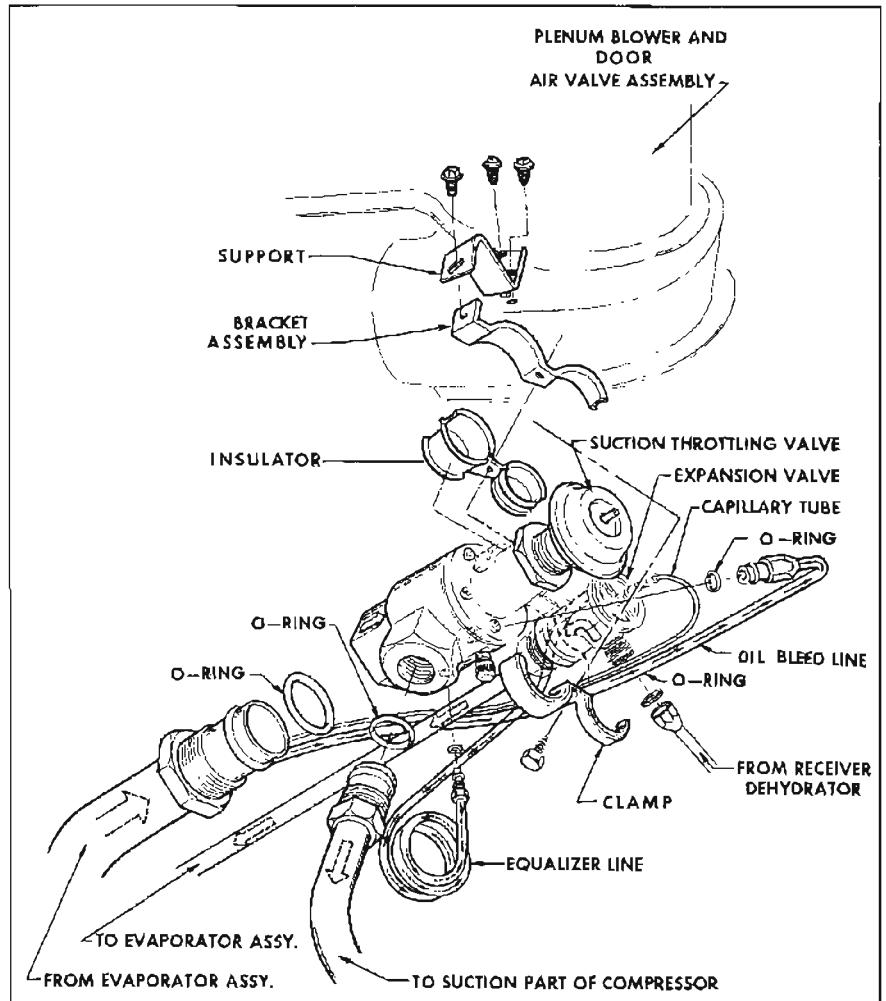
Suction Throttling Valve and Expansion Valve Installation
